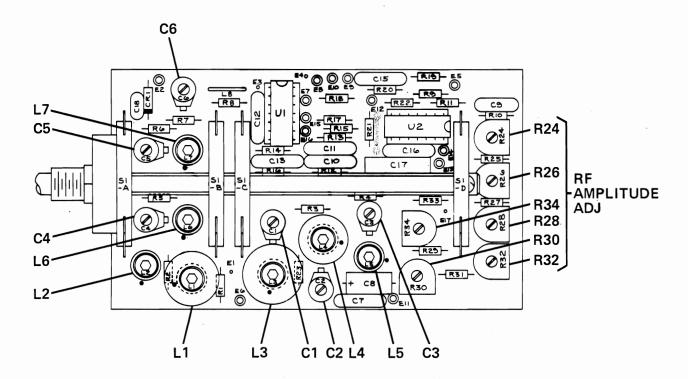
Printed Circuit Board A1A1, Components and Adjustments
